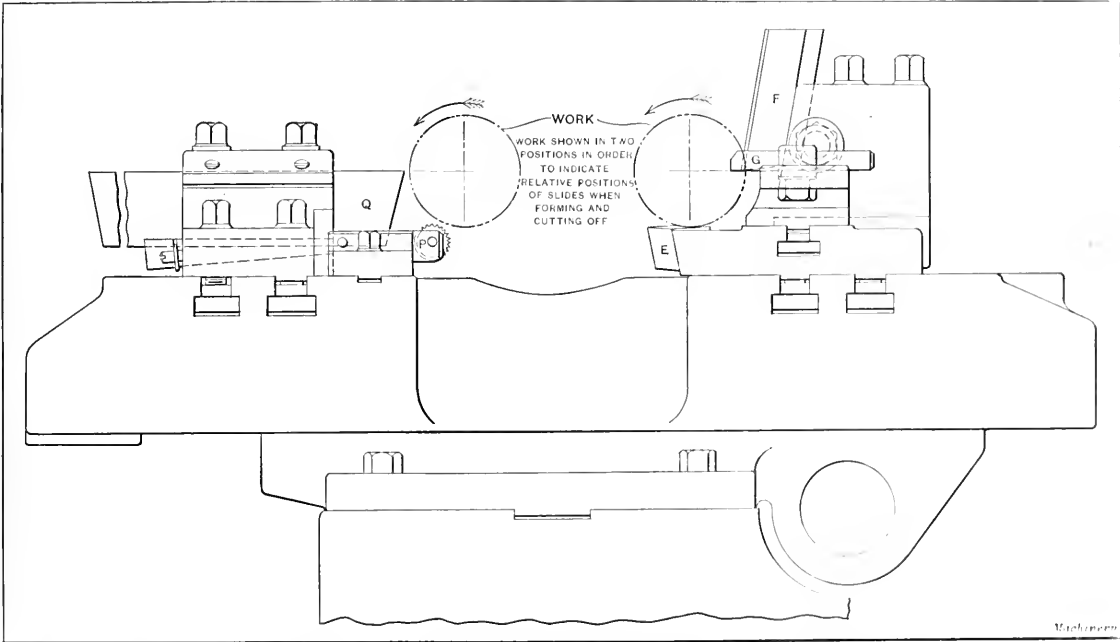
Showing Tools held on the Front and Rear Cross-slides for performing the Knurling, Forming and Cutting-off Operations on the Shrapnel Case
